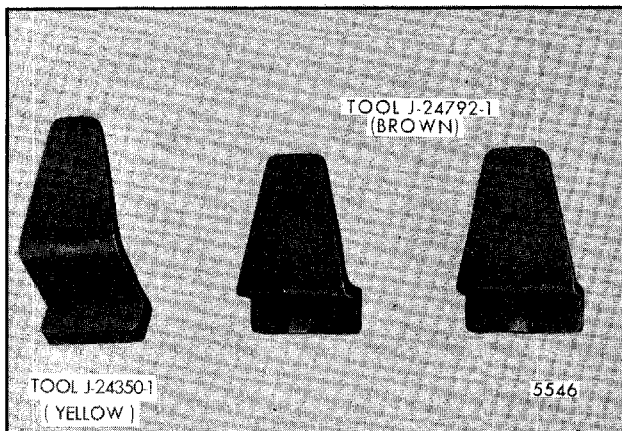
Glass Alignment Gauge Blocks - Tools J-24350-1 and J-24792-1 or Equivalent (Set of Three Blocks)
